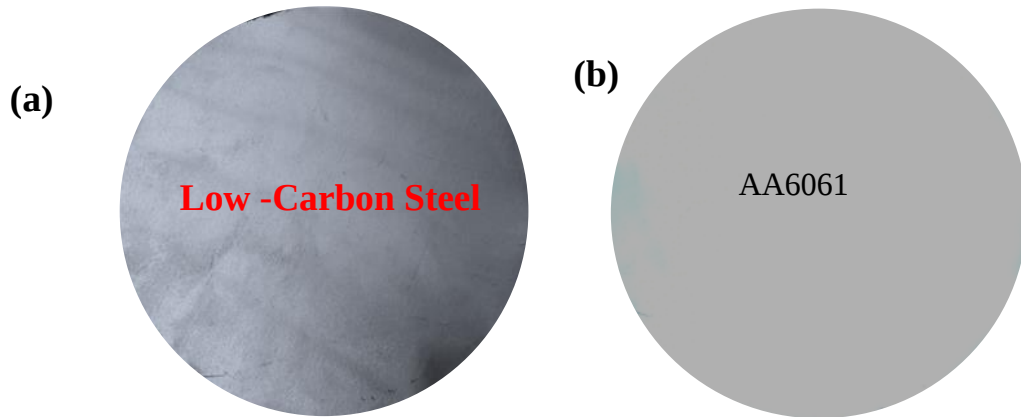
11: Initial blank with 90mm diameter (a) low carbon steel (b) AA6061 alloy
